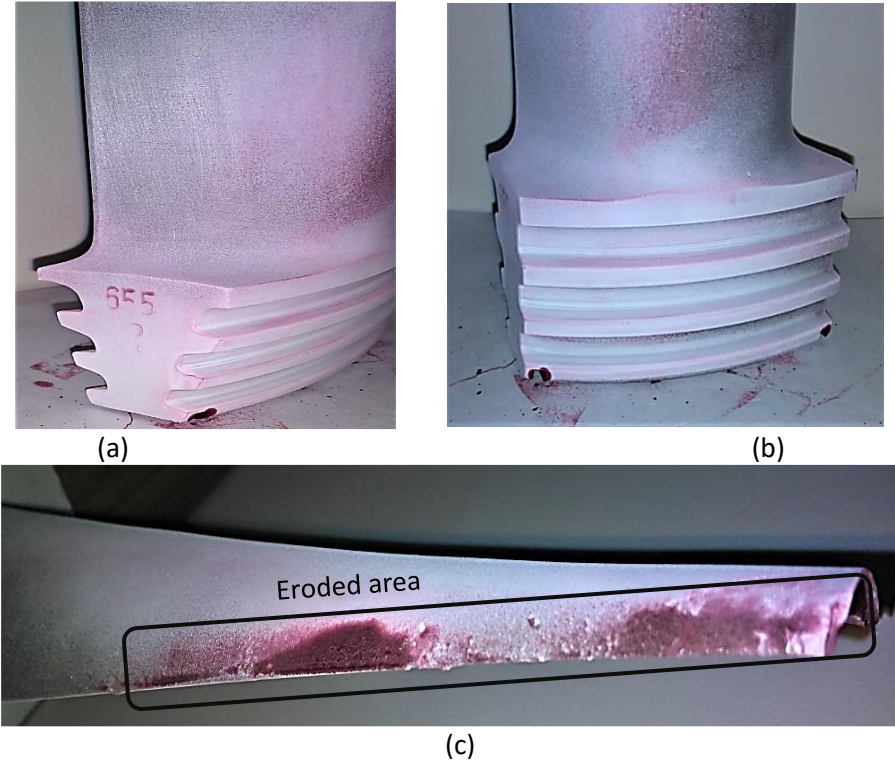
Blade root (a) side view (b) front view with no sign of a crack
